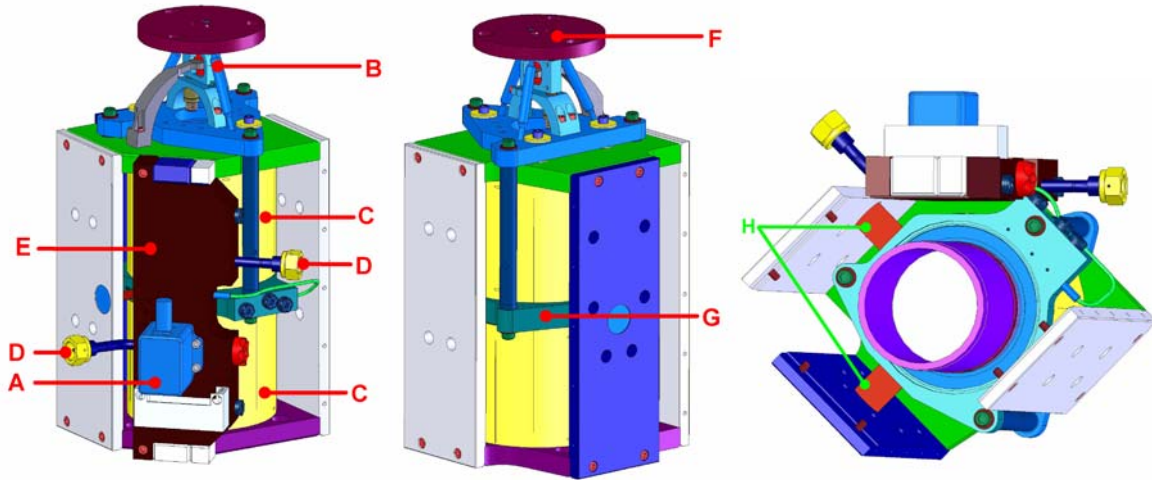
HEPI actuator, showing the Parker DYP2SC valve (A), tripod (B), bellows housing (C) (bellows are inside), fluid inlet and outlet (D), manifold (E), payload attachment plate (F), actuation plate (G). Bottom view is shown on the right, showing the side flexible joints (H). Lower structural plate and bellow are removed from the plot for better visibility.
